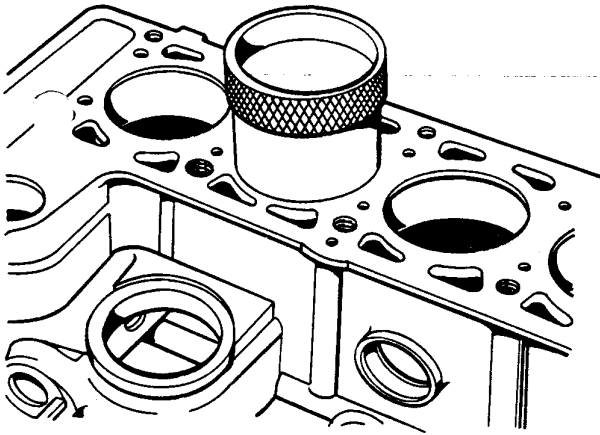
Installing Piston with Piston Rings into Cylinder with Piston Inserter Bushing from Set 2.7854.9500
